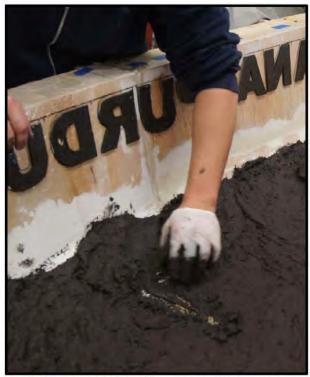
Placing a thin layer on the bottom of the exterior mold before reinforcement installation.
